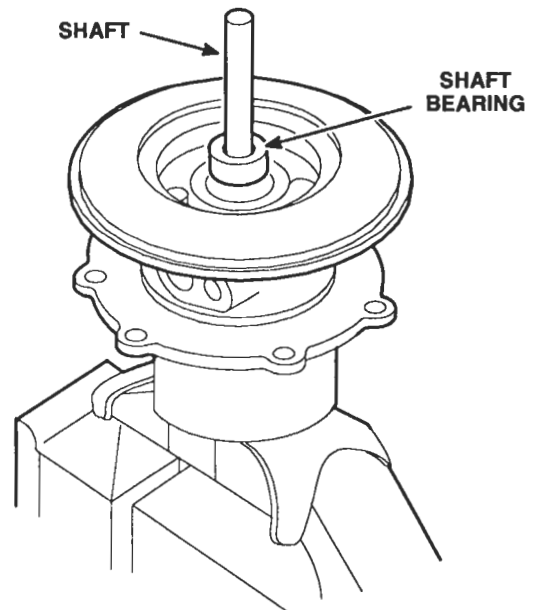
Shaft Bearing in Center Housing Installation (Compressor End)
